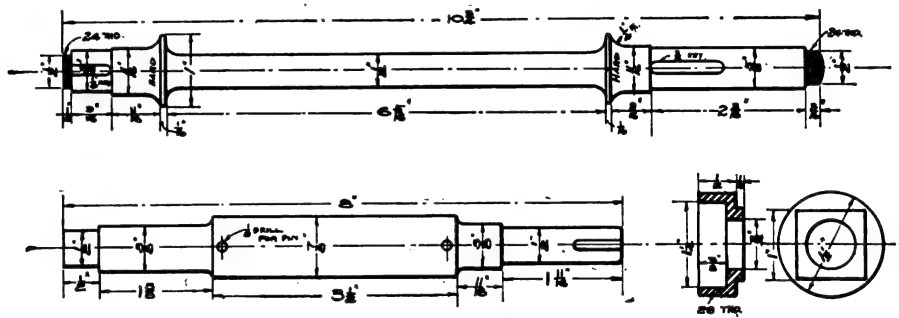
DETAILS OF ARMATURE AND COUNTER-SHAFTS.
